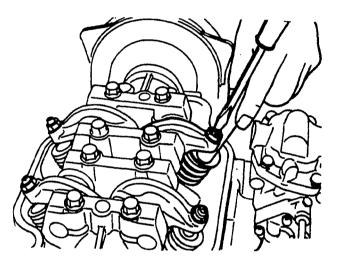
VALVE CLEARANCE ADJUSTMENT
